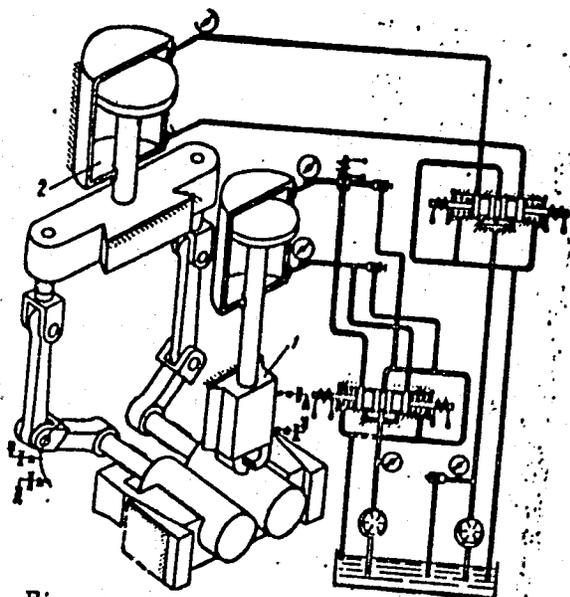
Kinematic diagram of cold-rolling mill for turbine blades
